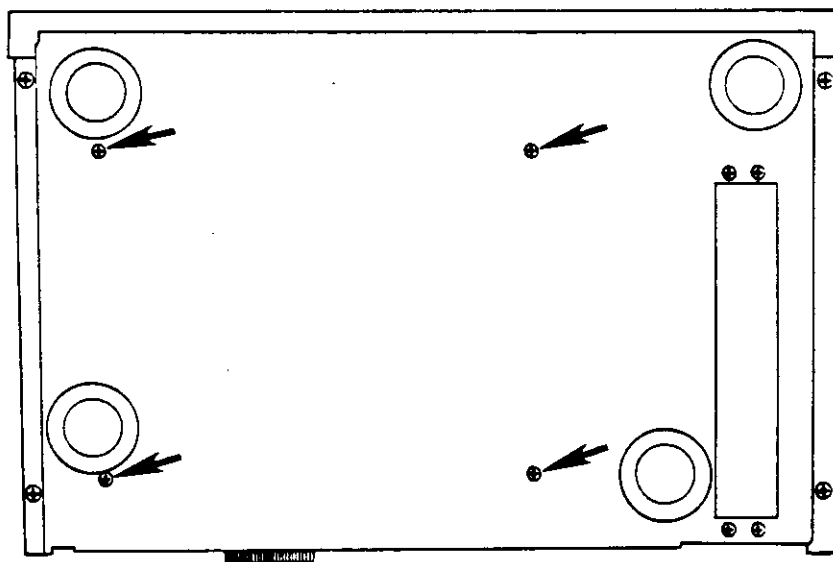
Motherboard Screw Locations (Chassis Base)
